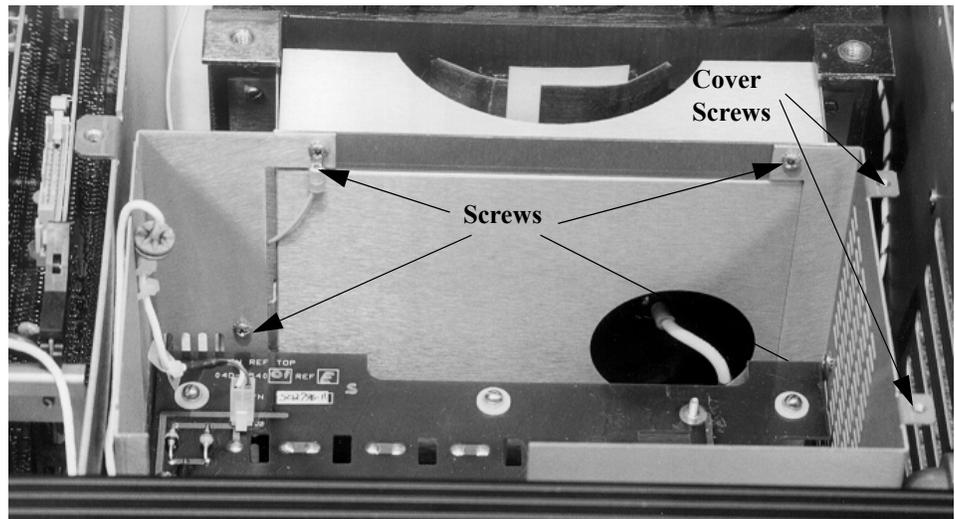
Guiding the Transformer Mounting Nuts into Position
